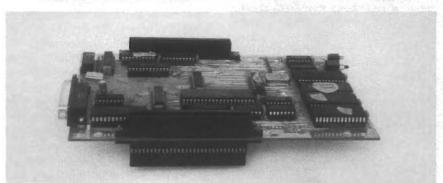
THE COMPLETED AUTHOR'S PROTOTYPE. While the prototype differs slightly from the project described in the article, your board and this one will appear similar
